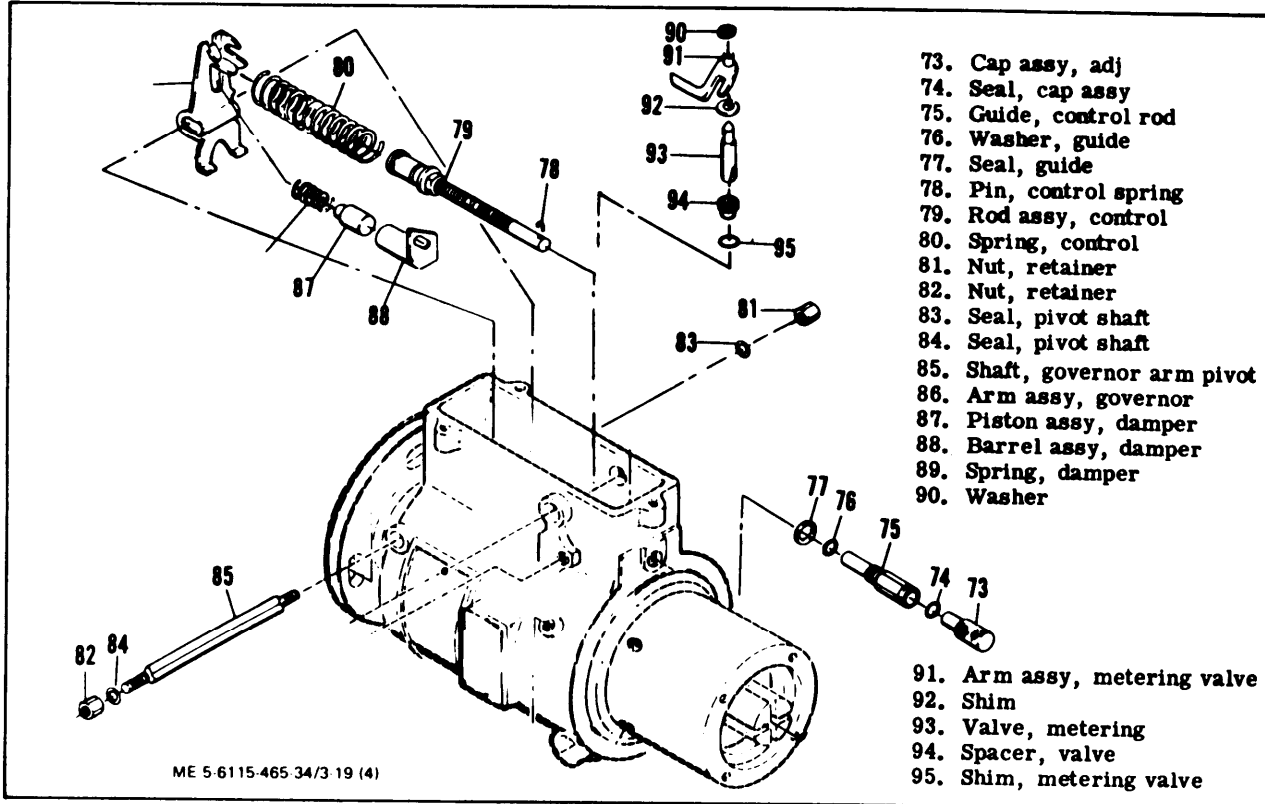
Fuel Injection Pump, Exploded View (Sheet 4 of 7)
